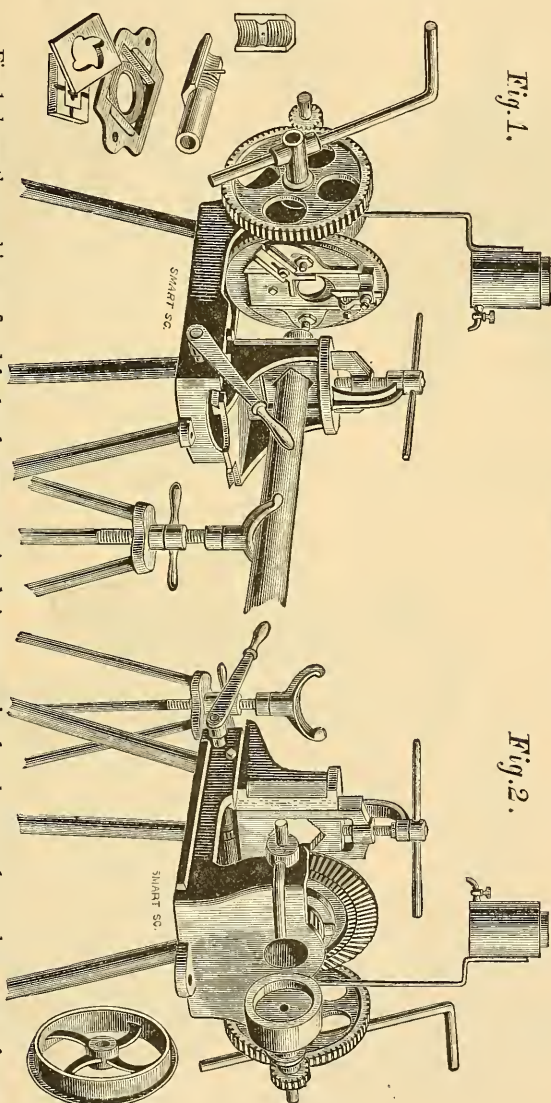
shows the machine as fitted for hand power, motion being transmitted to the several parts by means of gearing, as shown; while on the right is seen the pipe-rest and pipe held stationary by the adjustable jaws of the vise, which passes through the centre of gear, the rotary motion of which is imparted to the die held in the die box.
